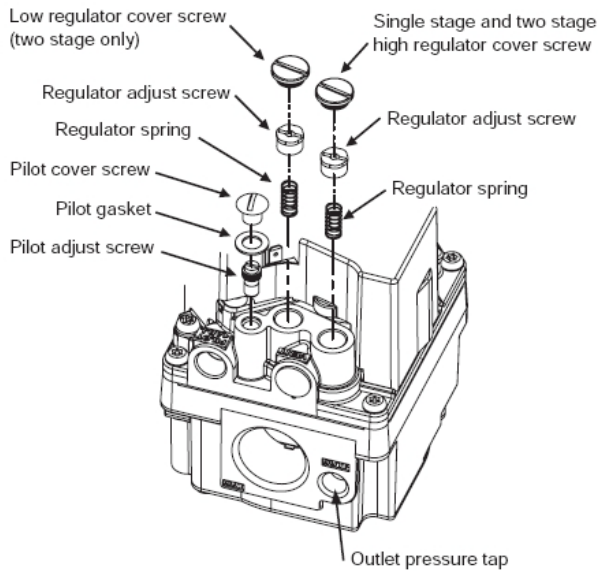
Two-Stage Spring Installation (36H Gas Valve Shown)
